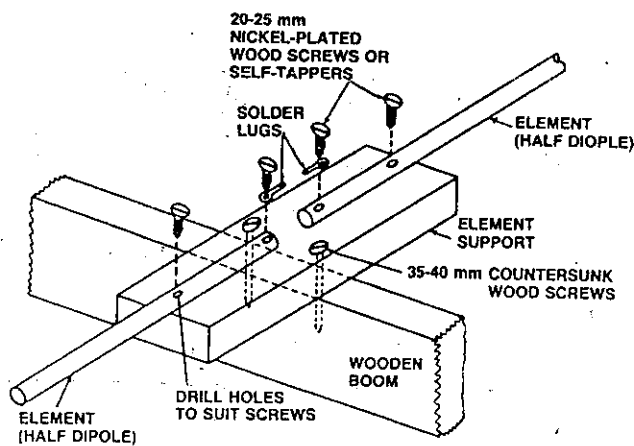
Element-to-boom mounting using wood construction. Estapol or stain all wooden components before assembly.
